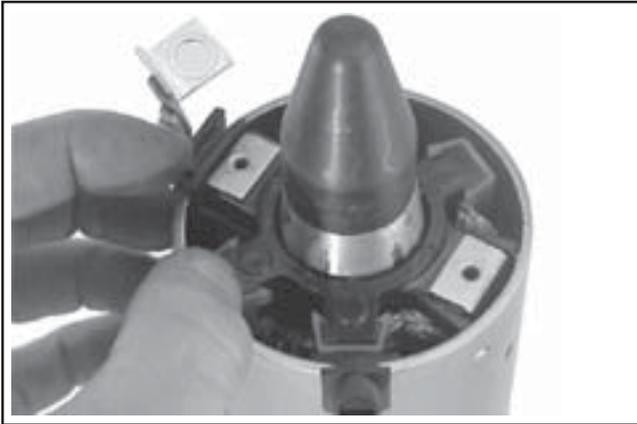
Installing Brush Holder Assembly Using Tool with Extension.
